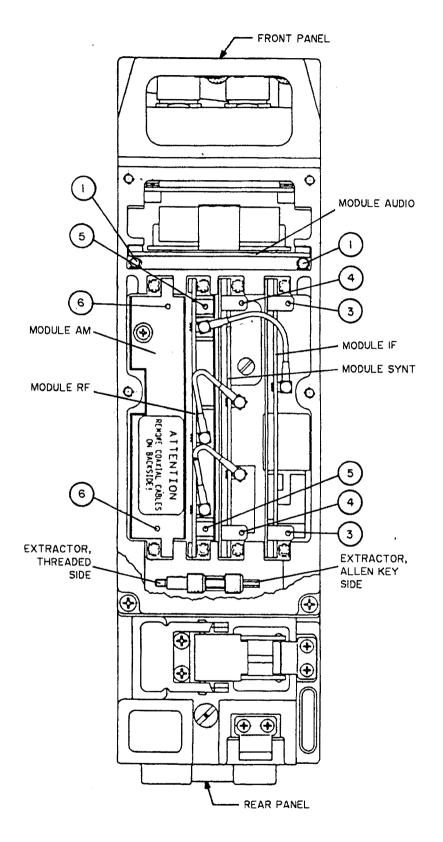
A. View on Modules Side (Sheet 1 of 2)
